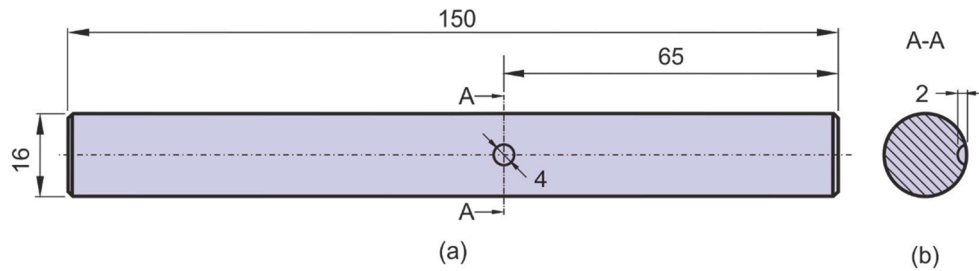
Specimen geometry used in the multiaxial fatigue programme: (a) front view; (b) transversal cross-section (units: millimetres).
